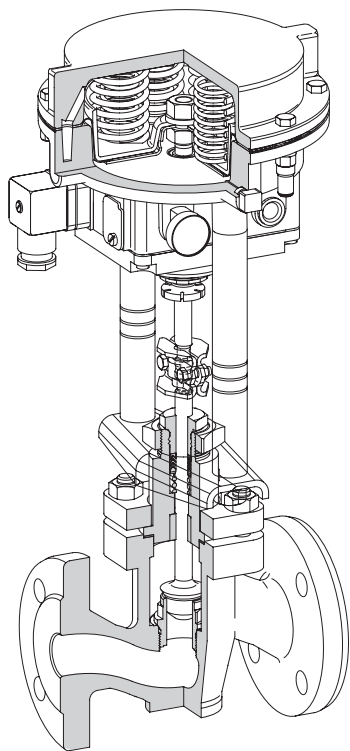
Type 3321-IP Globe Valve in valve sizes NPS 1/2 to 2, actuator with integrated electropneumatic positioner
